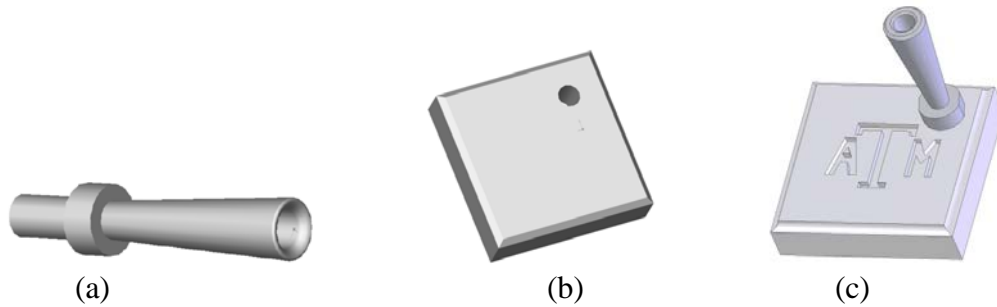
Parts for machining exercise (a) pen-holder, (b) pen-base, and (c) complete assembly.
